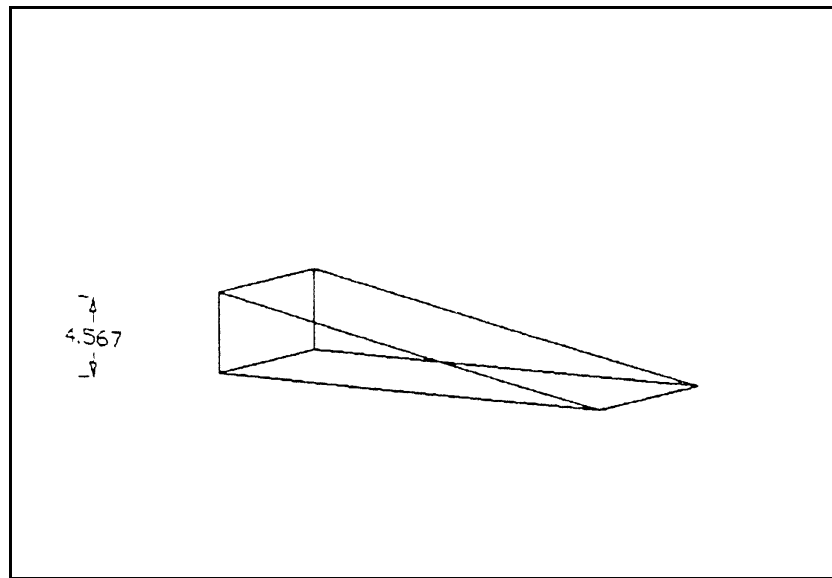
PRE-RECTIFIED WEDGE DRAWING WITH Z-TICAL DIMENSION
